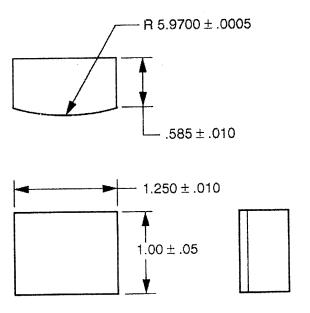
Upper convex inspection fixture pressure pad.
